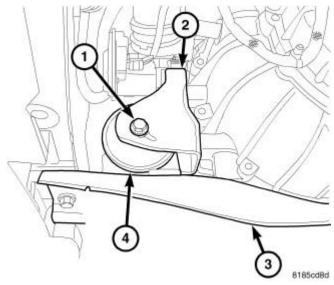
FRONT MOUNT THROUGH BOLT Courtesy of CHRYSLER LLC
